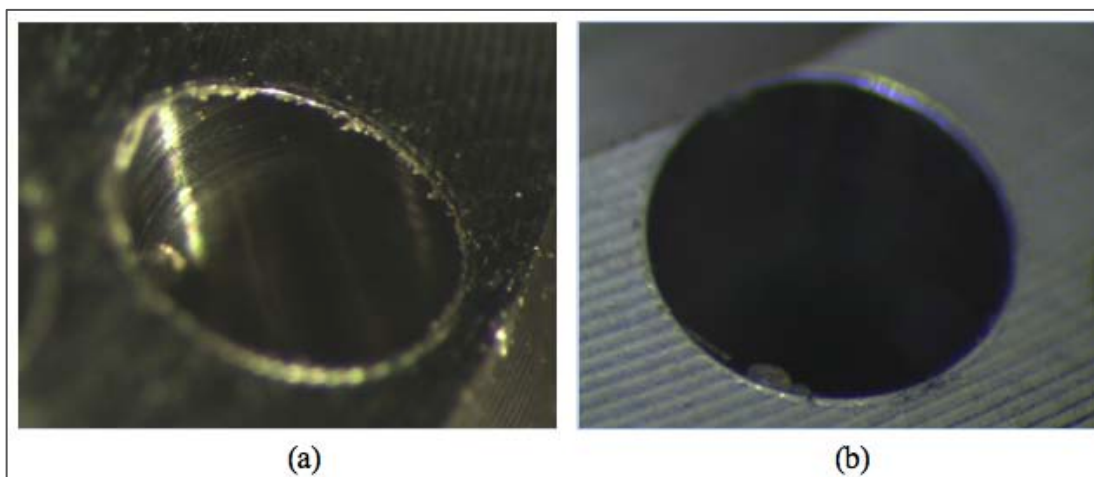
Burr on holes of part D before (a) and after the process (b)
